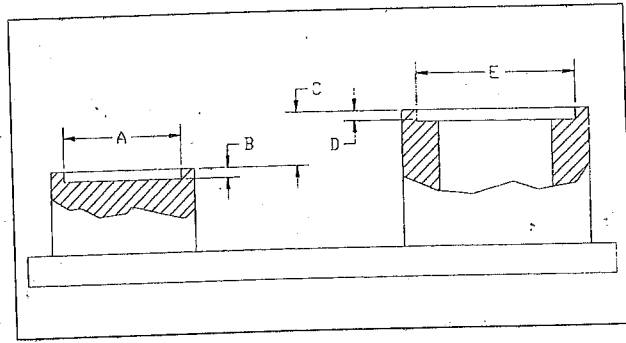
Tooling Dimensions (B = pin projection; C = link offset; D = bushing projection).
